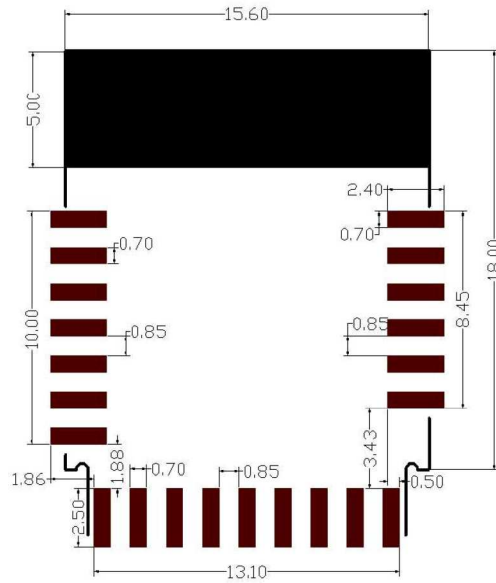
SMD PCB Land Pattern (Unit: mm)
